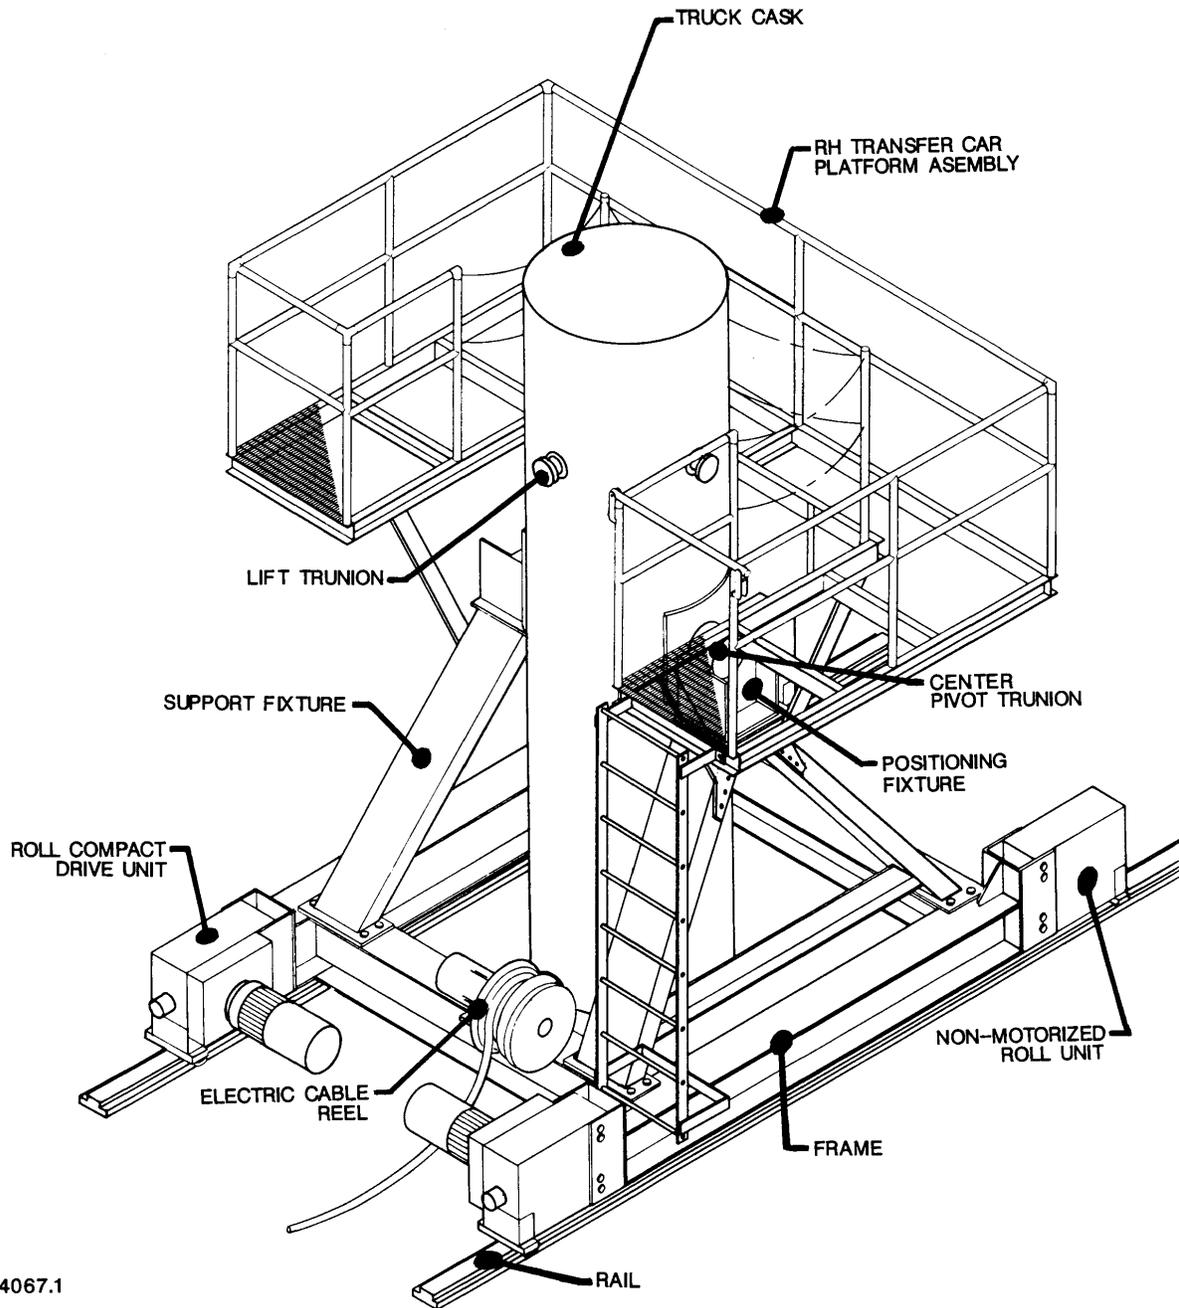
, RH TRU Waste Shielded Road Cask on Transfer Car
